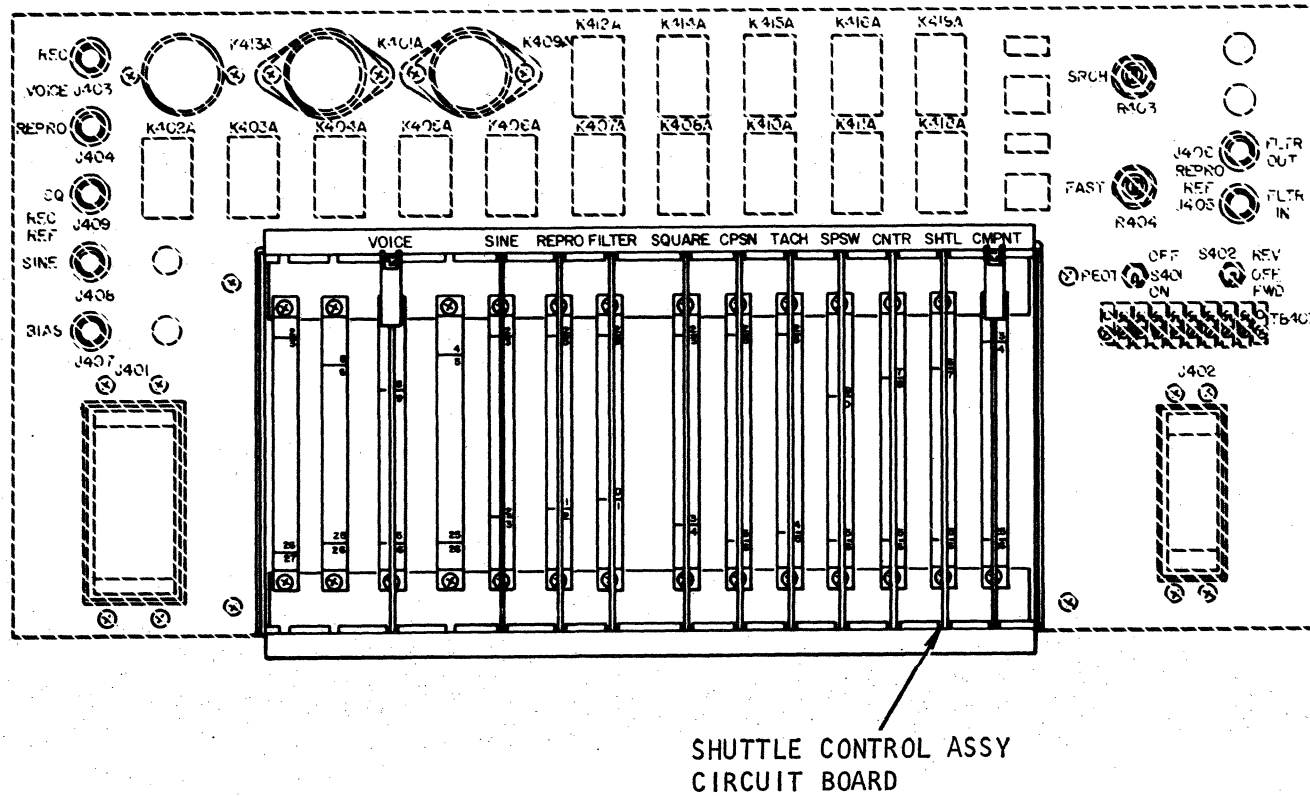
13-580 Shuttle Control Assembly Circuit Board Location
